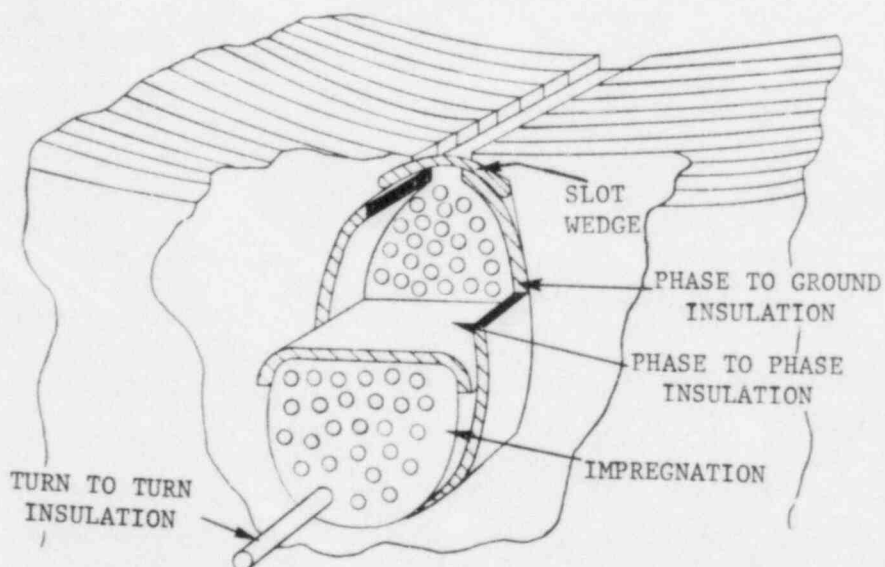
Random-Wound Stator Coil Insulation Cross-Section (Ref. 18)
